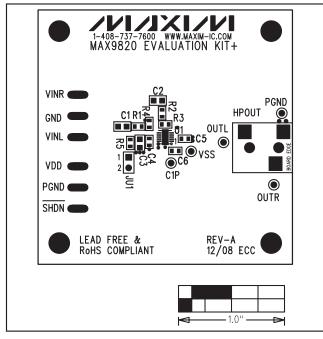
MAX9820 EV Kit Component Placement Guide—Component Side
